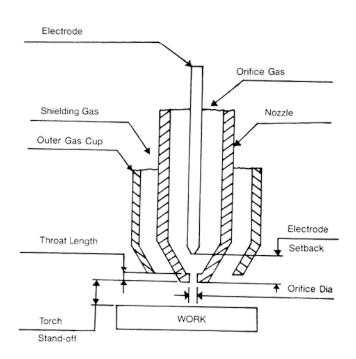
PLASMA ARC WELDING PROCESS
